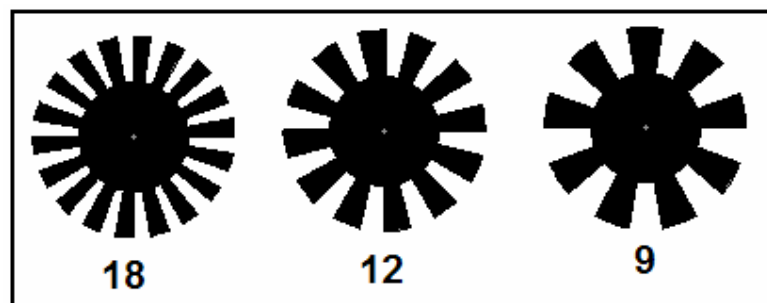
PCB Encoder Discs with Different Number of Copper Plated Fins
